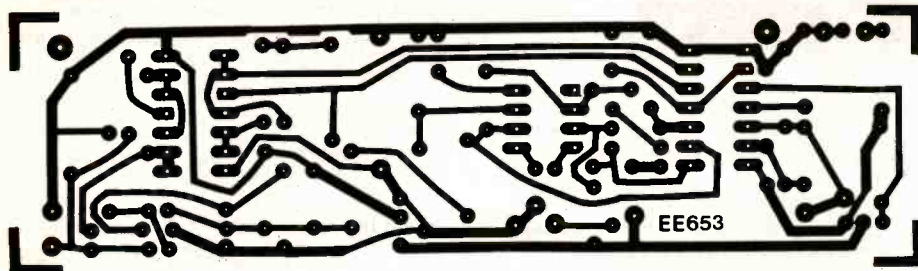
P.C.B. layout and wiring for the Probe. This board is available from the EE PCB Service.
